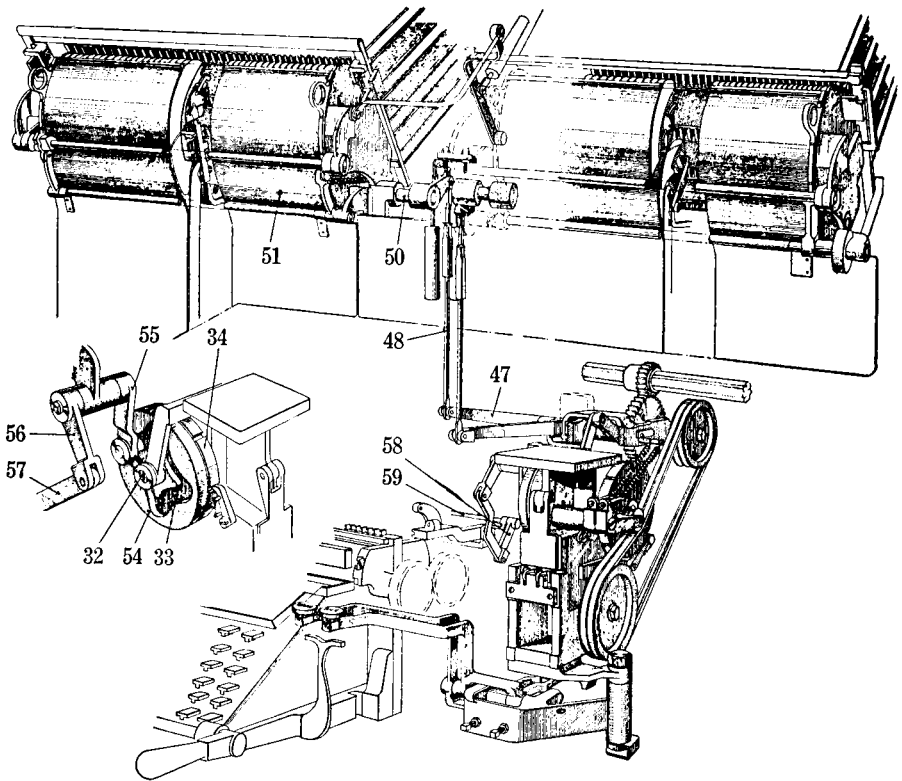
Perspective view with parts broken away, showing oscillating mechanisms for both "Main" and "Aux." upper assembler fronts, and showing also the cam and lever mechanism for operating the keyboard rod lever slide on "Two-in-One" type of Model 30.
